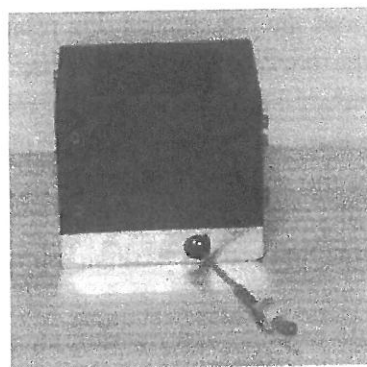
Partly mounted split mould for preparing frozen sand specimen. Top platen not mounted and not shown (Photo No 22).
